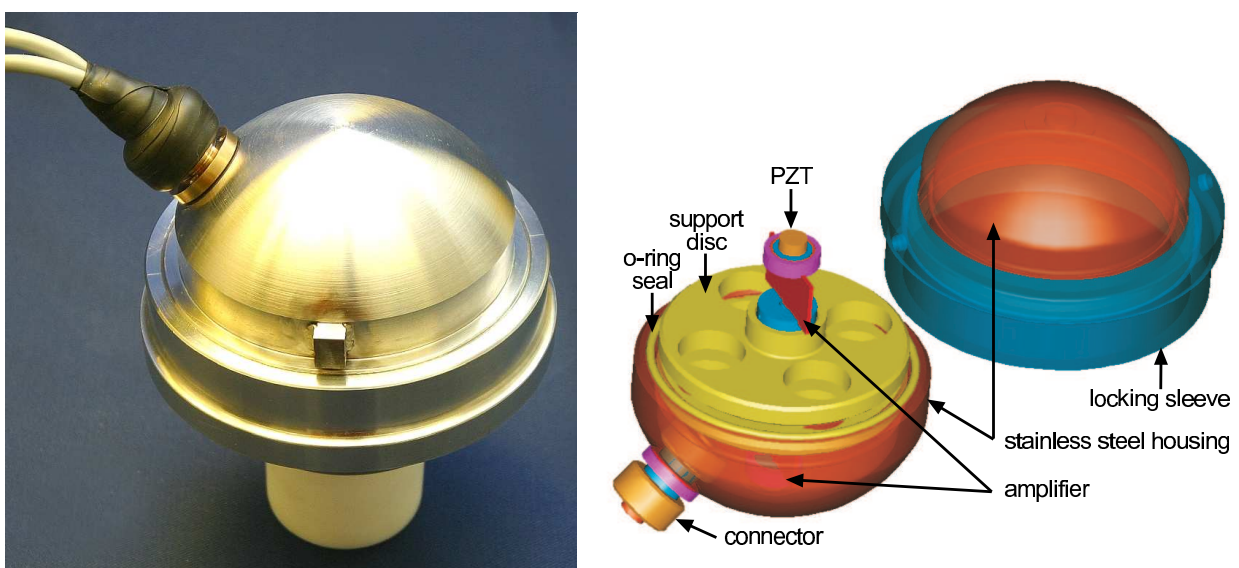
Pictures of the *iron ball sensor* (left) and a schematic drawing (right).
